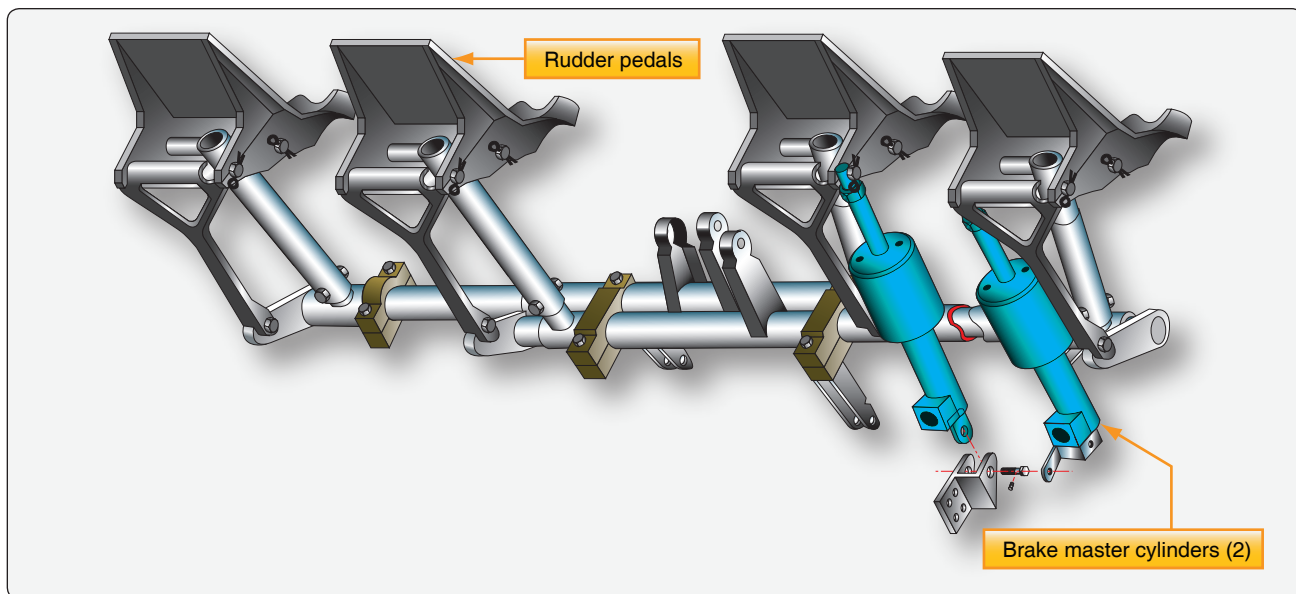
Master cylinders on an independent brake system are directly connected to the rudder pedals or are connected through mechanical linkage.
